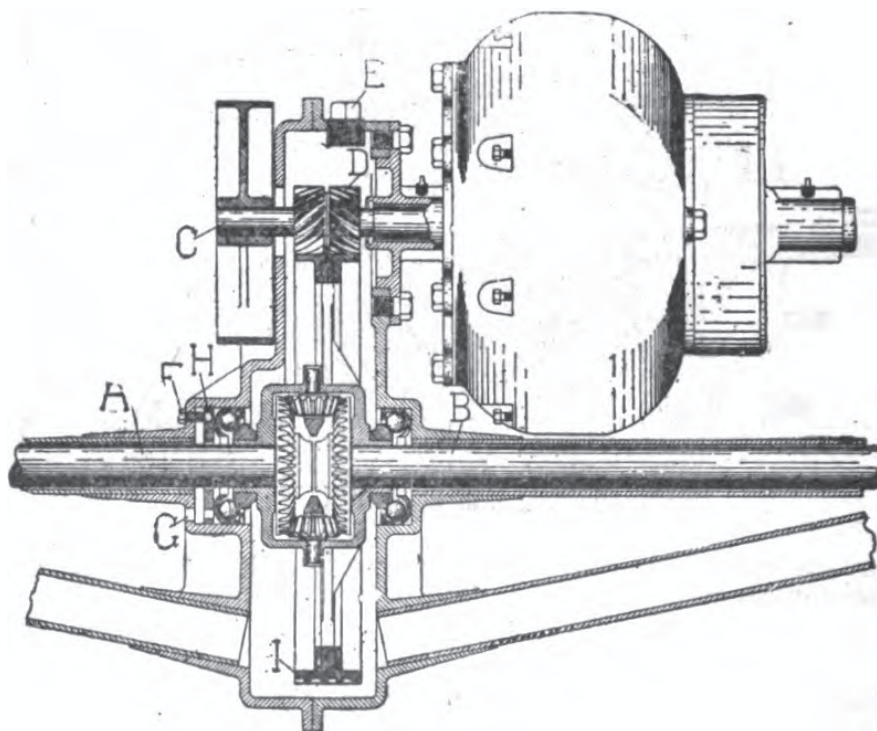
,069.—Diagram of a single motor attached to rear axle through "herringbone" single reducing gears. A, is the left hand section of the divided rear axle; B, the right hand section of the rear axle; C, the brake drum; D, the spiral pinion on the motor shaft driving the worm gear, I, on the differential; E, plug for greasing gears; F, set screw for locking ball race; G, slot for wrench to adjust threaded ring, H, against ball bearings.
